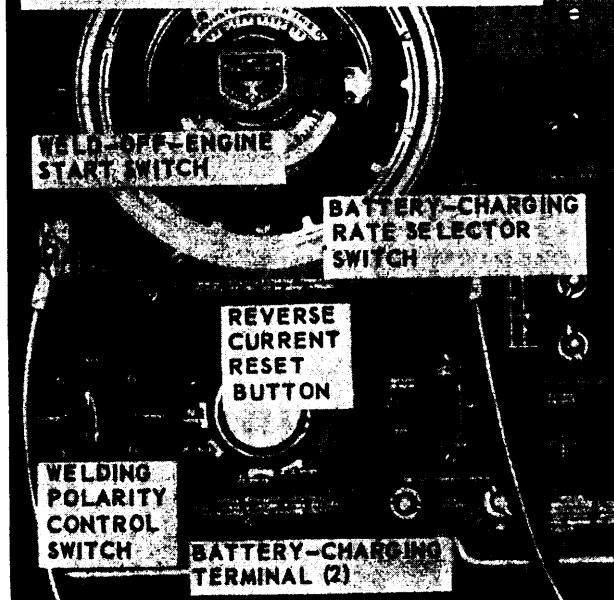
Operation of the generator-welder as a remote controlled arc welder.
